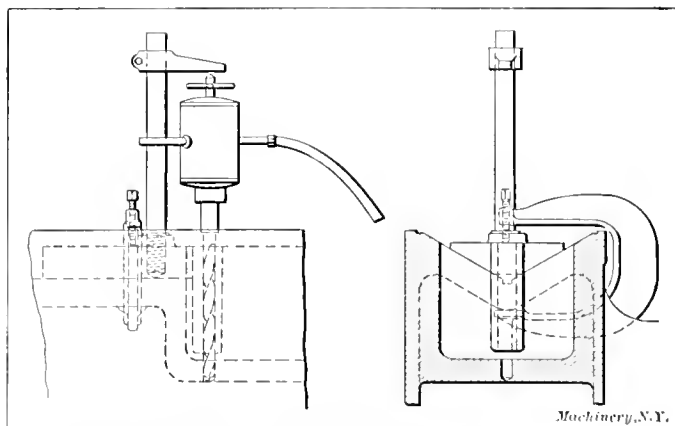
Combination Drill Jig and "Old Man" for Drilling Hole in Oil Pockets for Oiling Device. Jig Insures Hole being drilled in Center of Way
